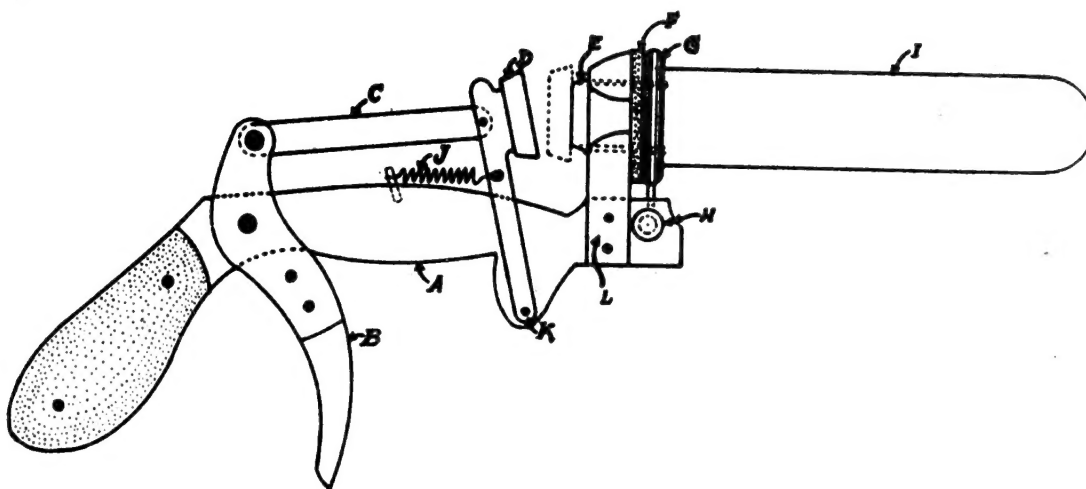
A drawing of the leaf punch, showing arrangement of integral parts. A, Aluminum frame; B, trigger arm; C, thrust arm; D, compression unit; E, cutting tool; F, sponge rubber; G, test tube support; H, screw to fasten support to the punch; I, test tube; J, spring to release punch; K, bearing for compression unit; L, cutting tool holder. This drawing is approximately one-half natural size.
